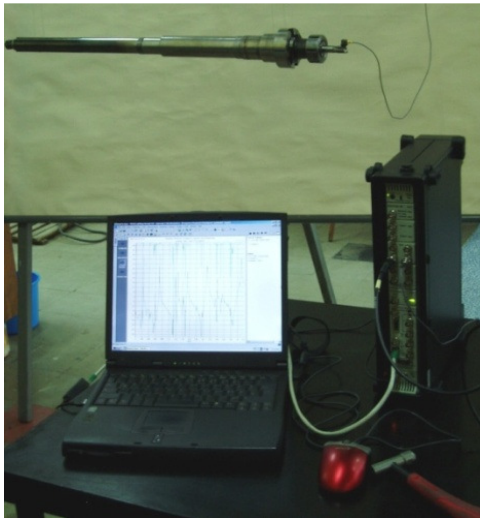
Measuring chain for the identification of dynamic behavior of the spindle–tool holder–tool system
